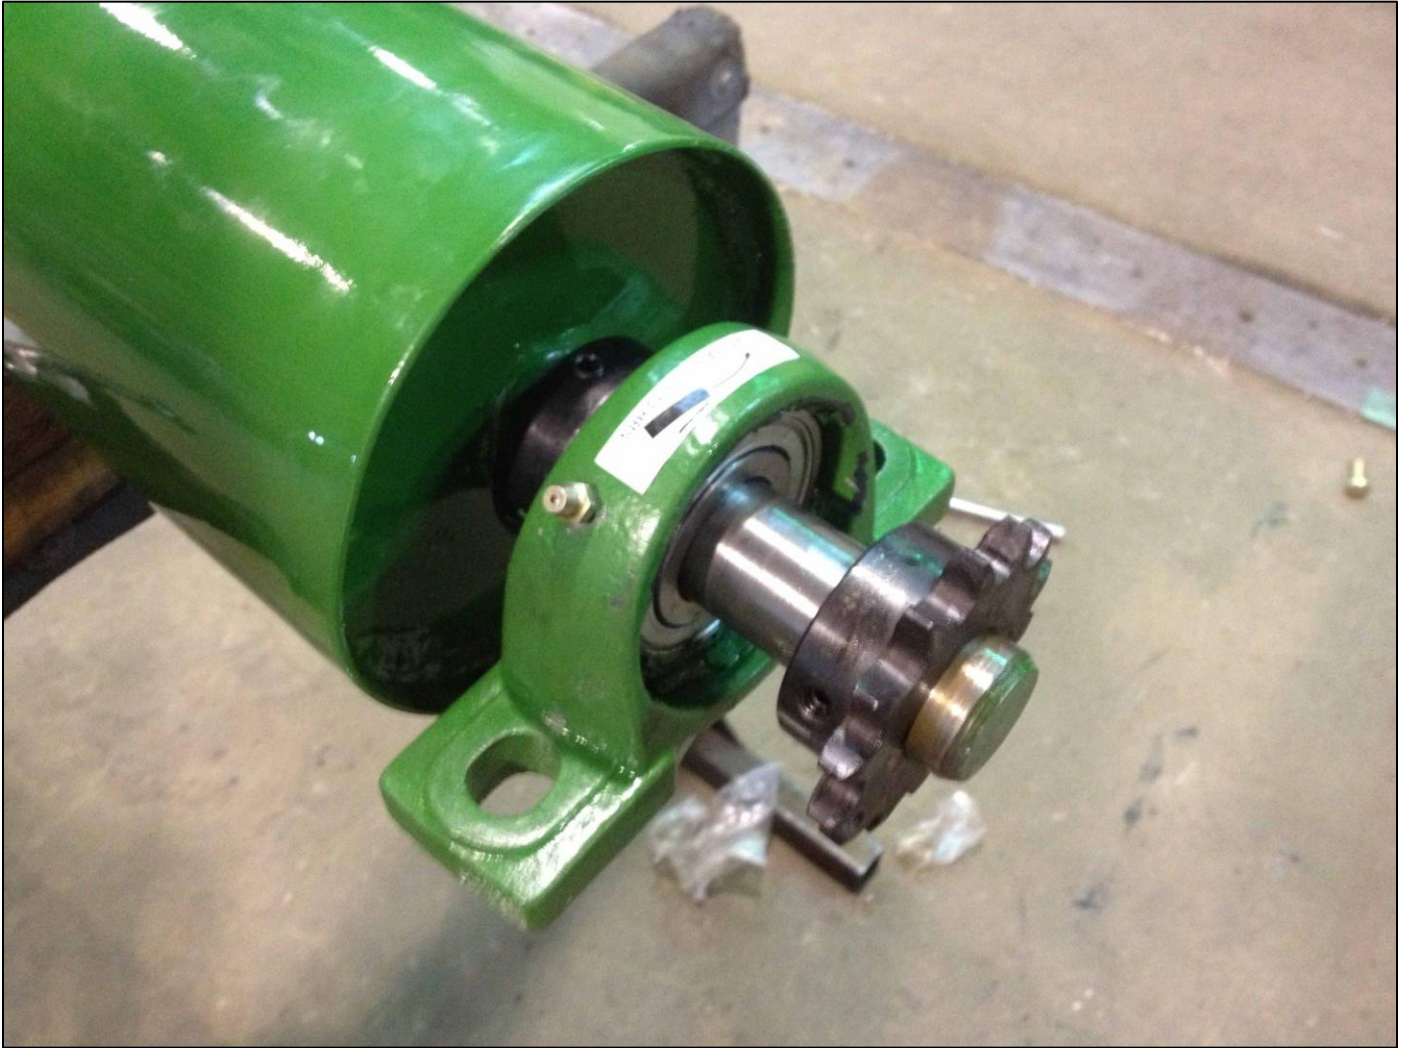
INNER END OF AUGER WITH SPROCKETS AND BEARING INSTALLED BEFORE HANGING
